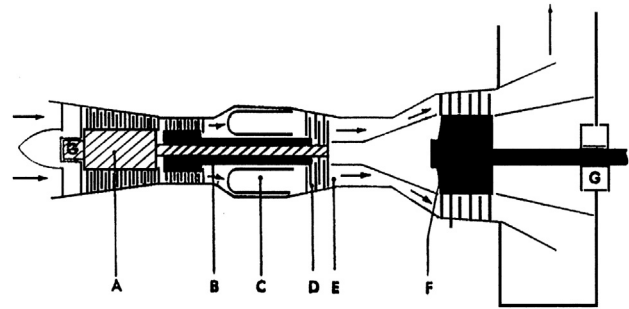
Dual-shaft gas turbine. A: LP compressor; B: HP compressor; C: combustors; D: HP compressor turbine; E: LP compressor turbine; F: power turbine; G: bearings [3-3].
